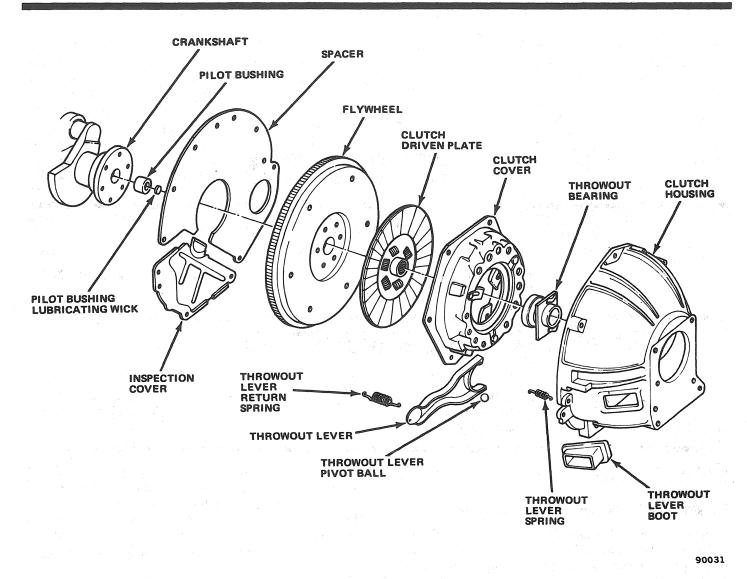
A-1 Clutch Assembly—Six- and Eight-Cylinder Models
